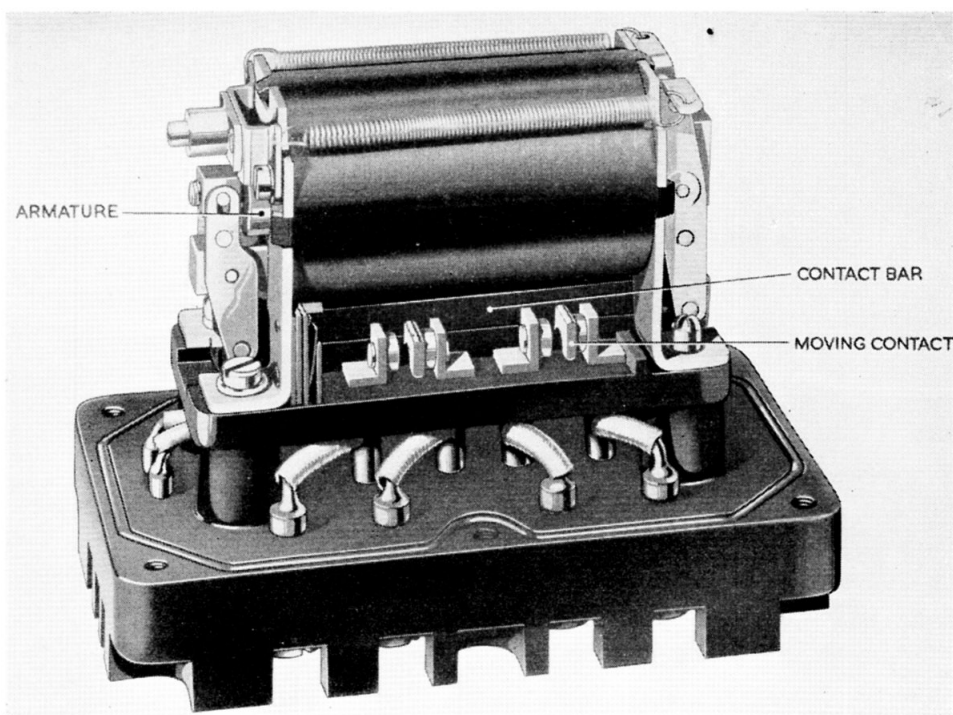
Magnetic relay switch, Type S2, showing cover removed
